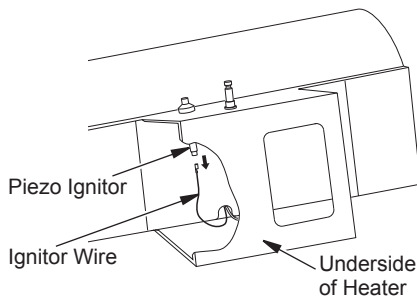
Removing Ignitor Wire from Piezo Ignitor
